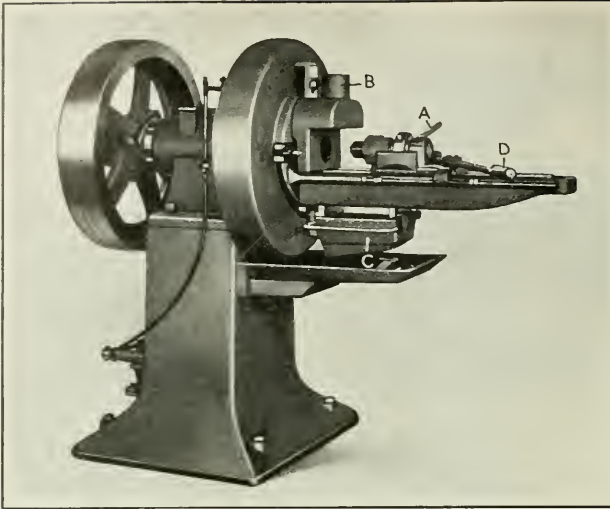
Machine with Smokestack, Hand-operated Work-holder and Rack and Pinion Feeding Device
